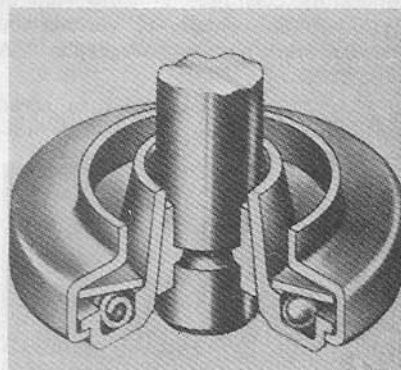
Rotacap positive type valve rotators as installed in the TO30 engines. Similar rotators are available for servicing the TE20 and TO20 engines.
